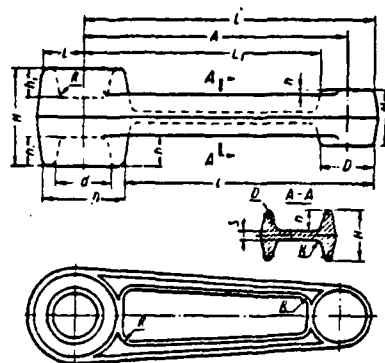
Sizes/dimensions of blank for the designation/purpose of manufacturing tolerances (tolerances).
